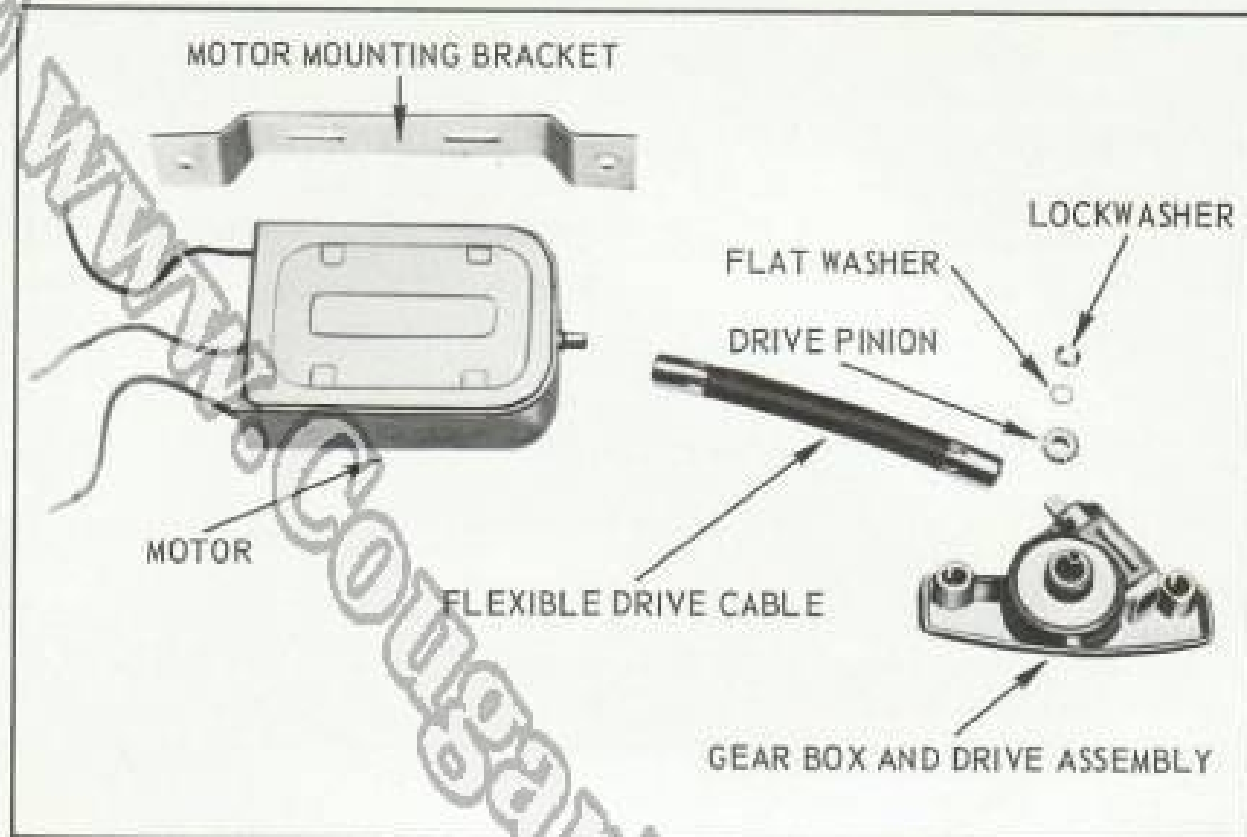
Sun Roof Panel Motor, Gear Box and Drive Assembly and Associated Parts
